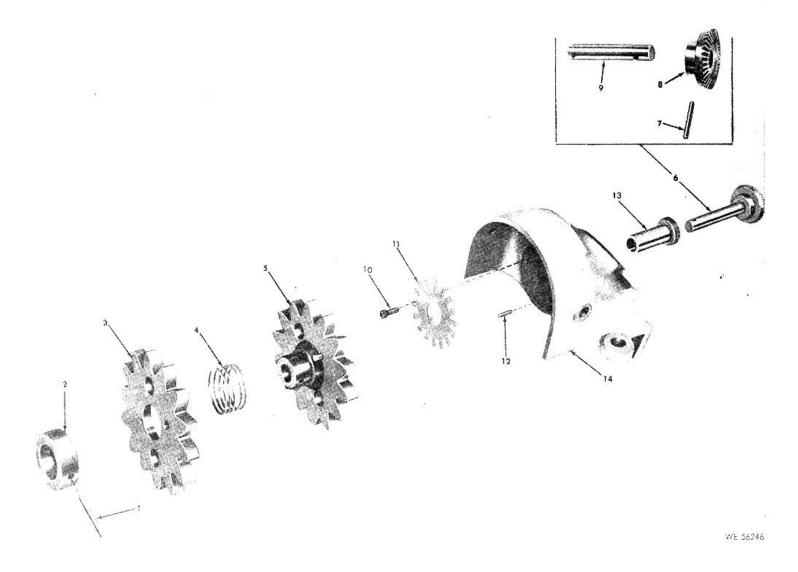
Disassembly of Housing Assembly 10954711-partial exploded view
